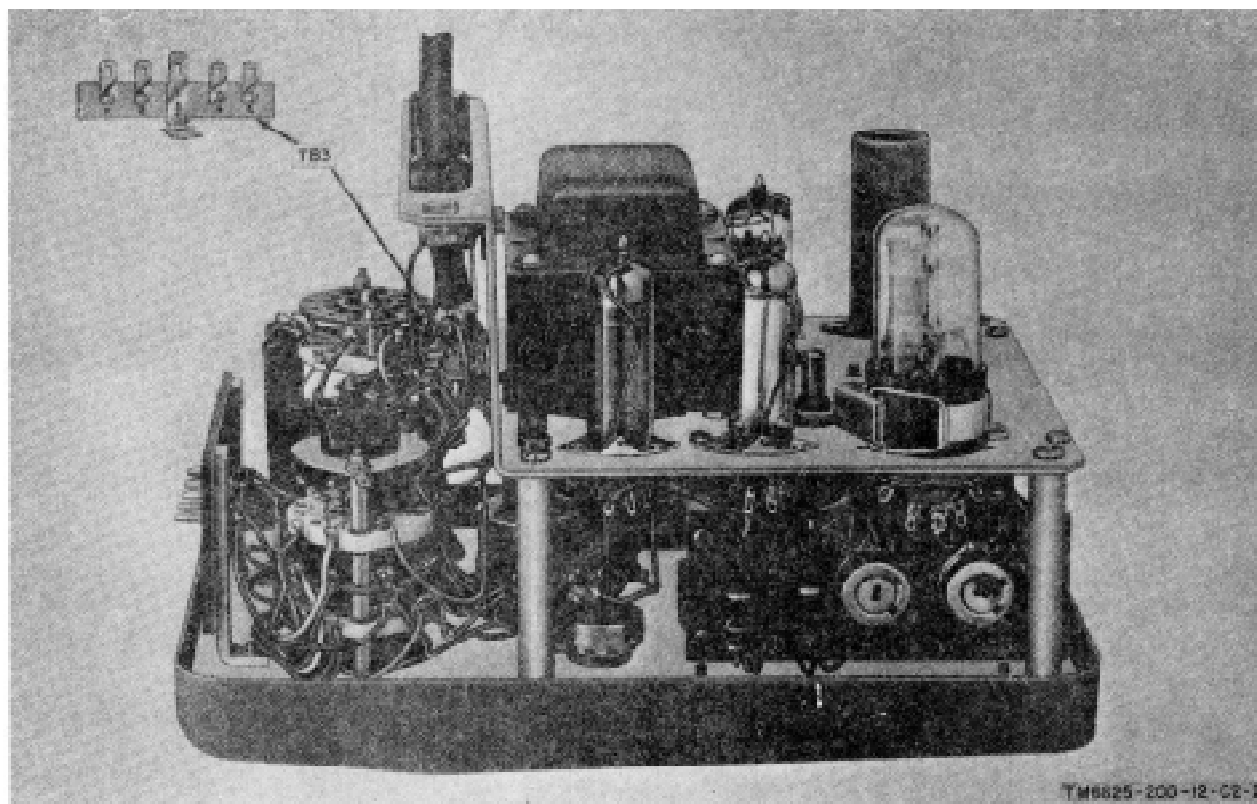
Multimeter ME-26A/U chassis, side view, showing location of terminal board TB3.
